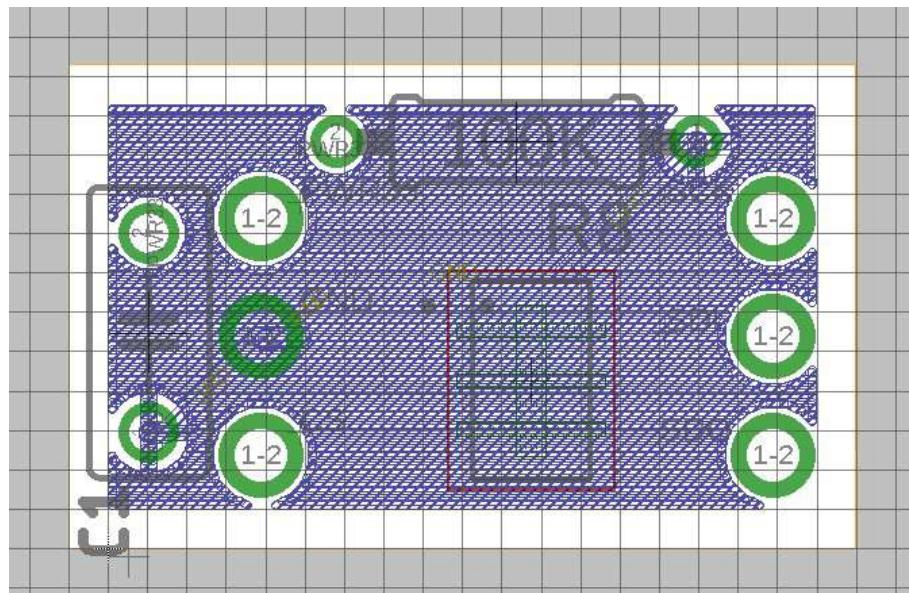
Barometric pressure sensor PCB bottom layer Layout in Eagle.
